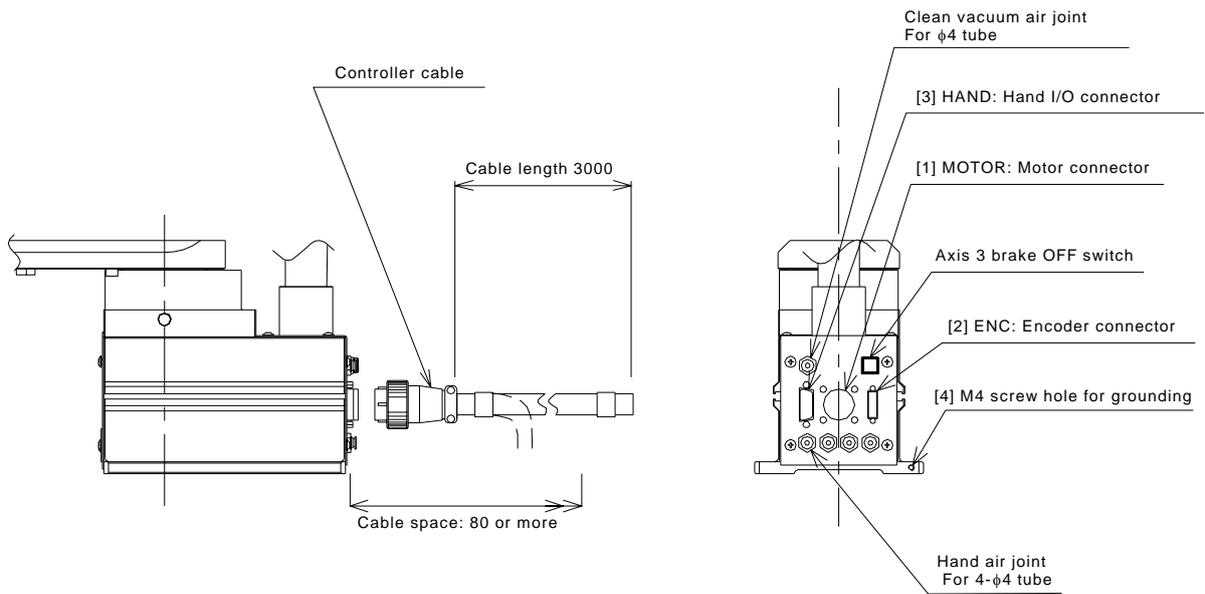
Robot side connector layout drawing (TH250A, TH350A)
